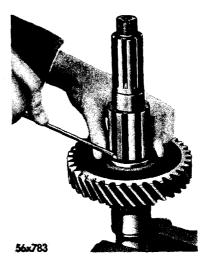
Removing 2nd Speed Gear Thrust Washer
